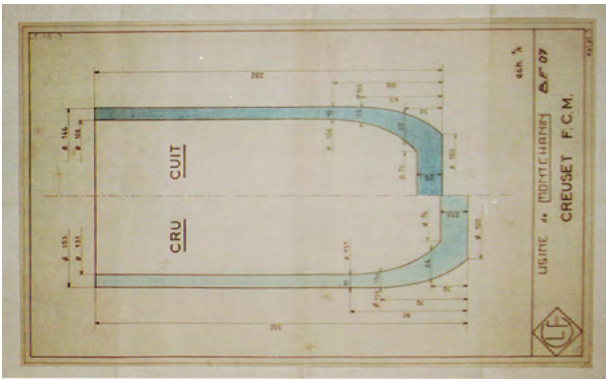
Le Creusot Ecomusée : Melting pot, drawing of manufactured part
